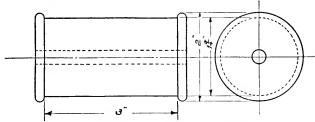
BOBBIN FOR STANDARD WINDING TEST.
